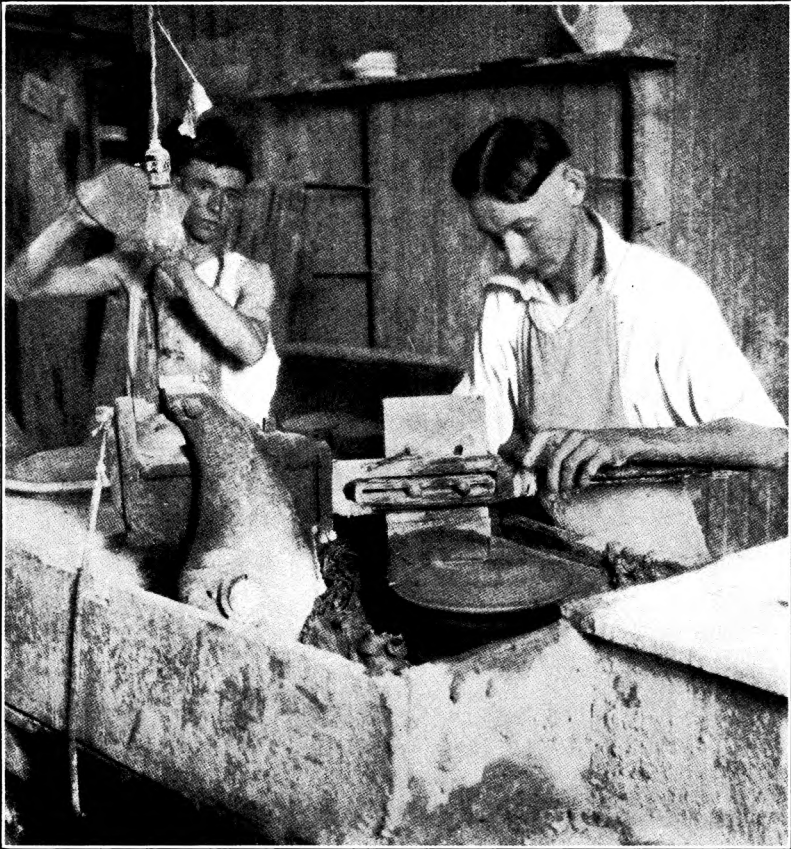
AT LEFT, BATTER-OUT PLACING A FLATTENED BAT OF CLAY ON A MOLD; AT RIGHT, JIGGERMAN SHAPING UNDERSIDE OF A PLATE FROM A BAT OF CLAY WITH THE PULL-DOWN AND THE REVOLVING HEAD
